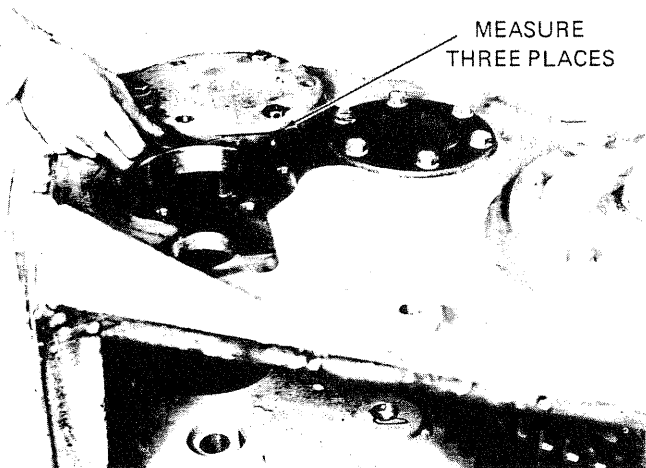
INSTALLATION OF BRAKE SHAFT (Sheet 2 of 2)
